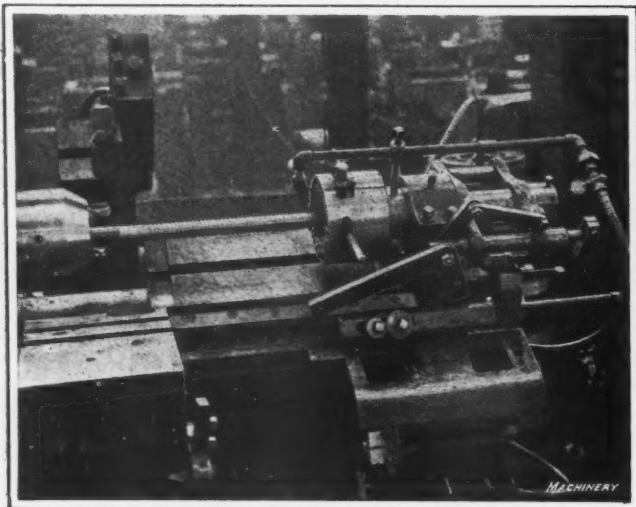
Setting Opening Die with Roll on High Point of Cam
